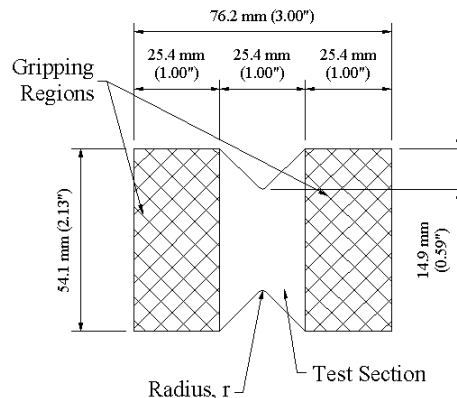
ROUNDED V-NOTCHED SPECIMEN DIMENSIONS
